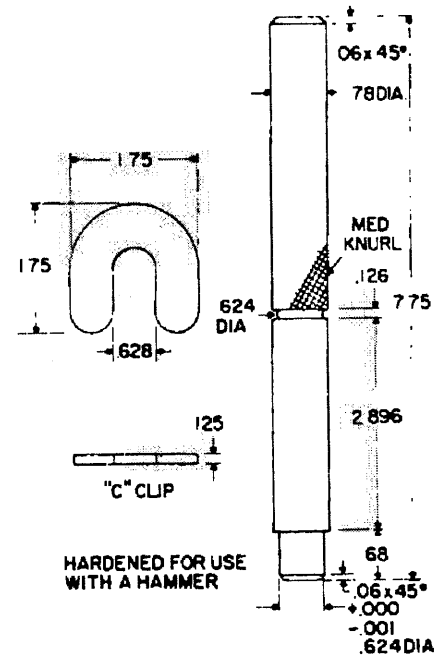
Drawing of special tool that should be used to install needle bearing (34—Fig. E3-33).
